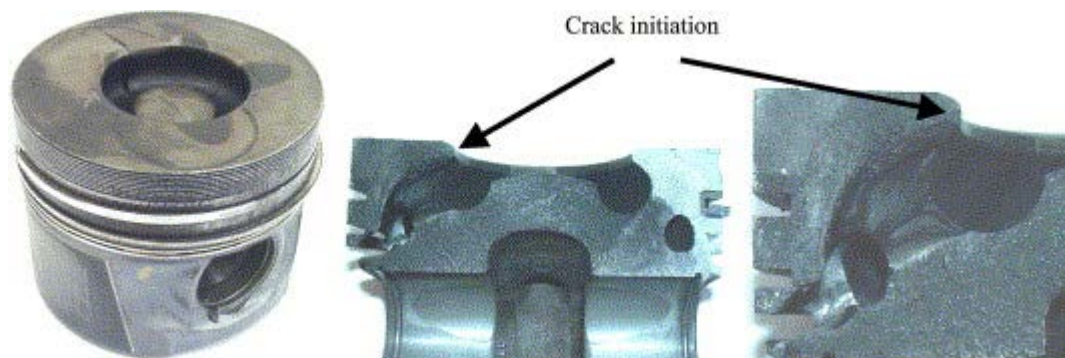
Diesel engine piston (with cooling gallery) with a crack from one side of the pin hole to the head [14]
